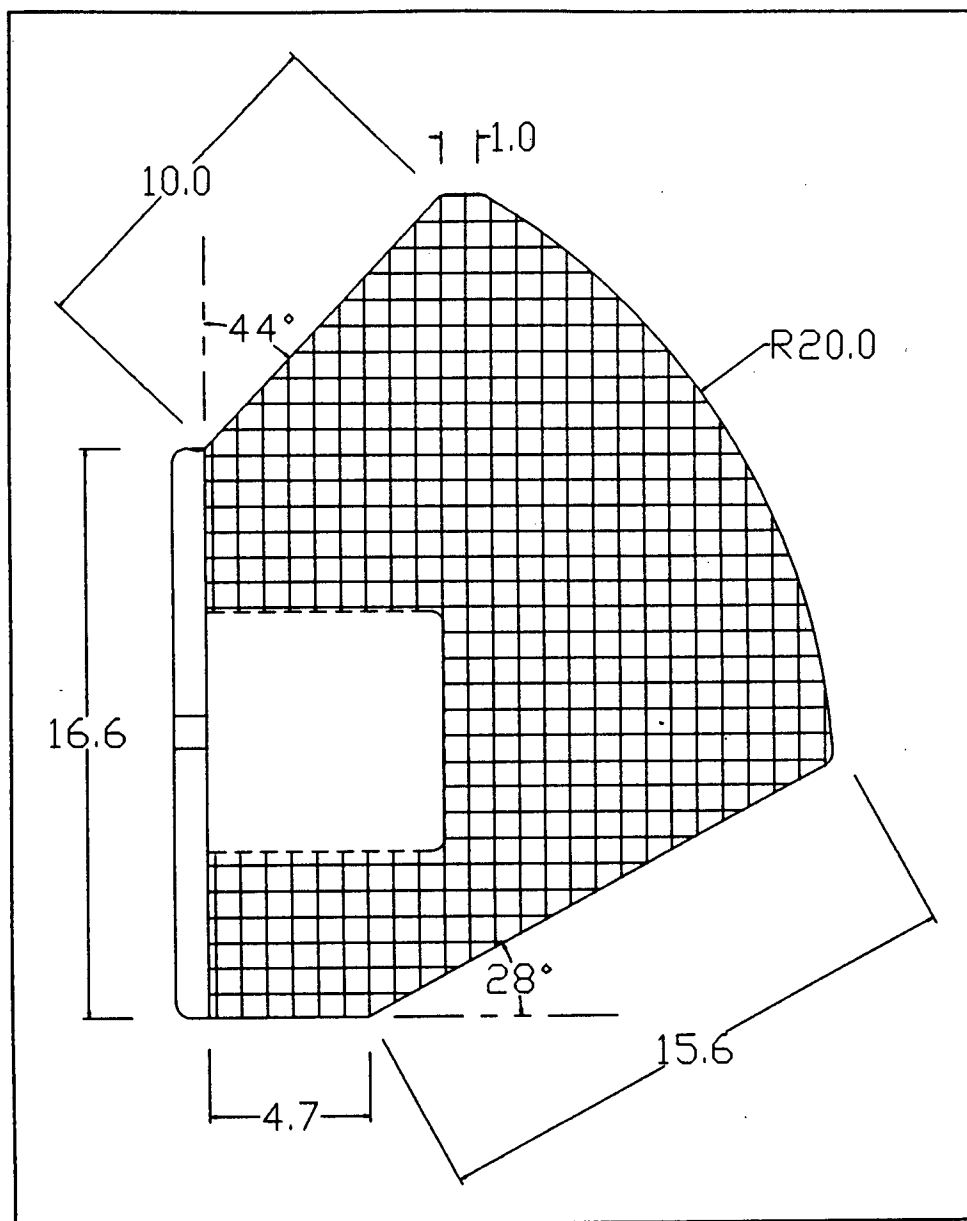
Bottom view of the ulnar component indicating the cross-hatching.
